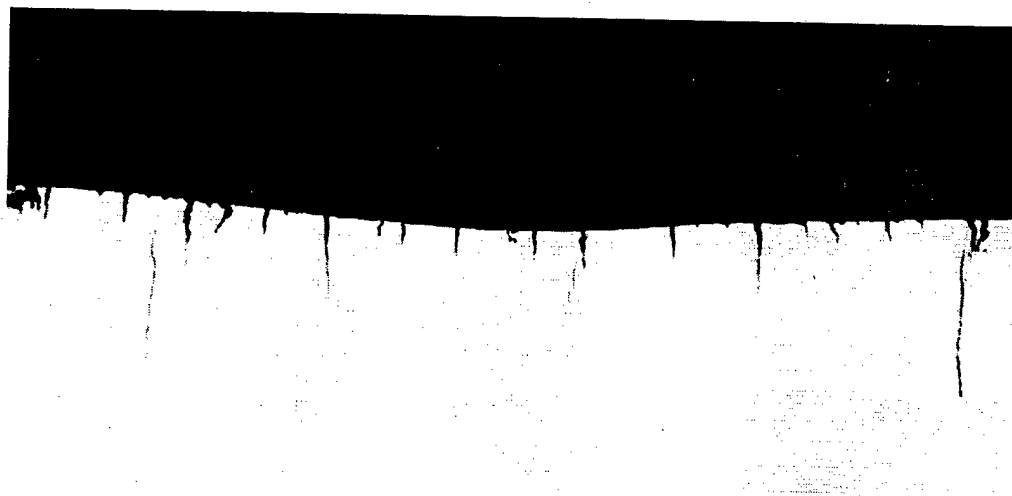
Transverse view of heat-check damage and resulting fatigue cracking.
